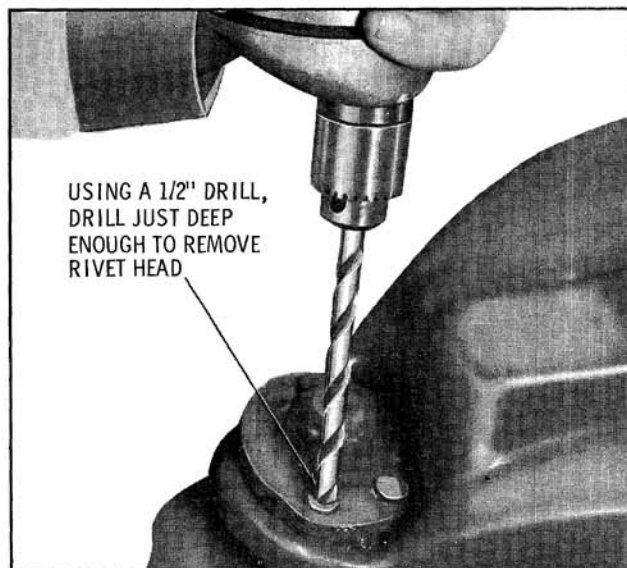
B Drilling Ball Joint Attaching Rivets
